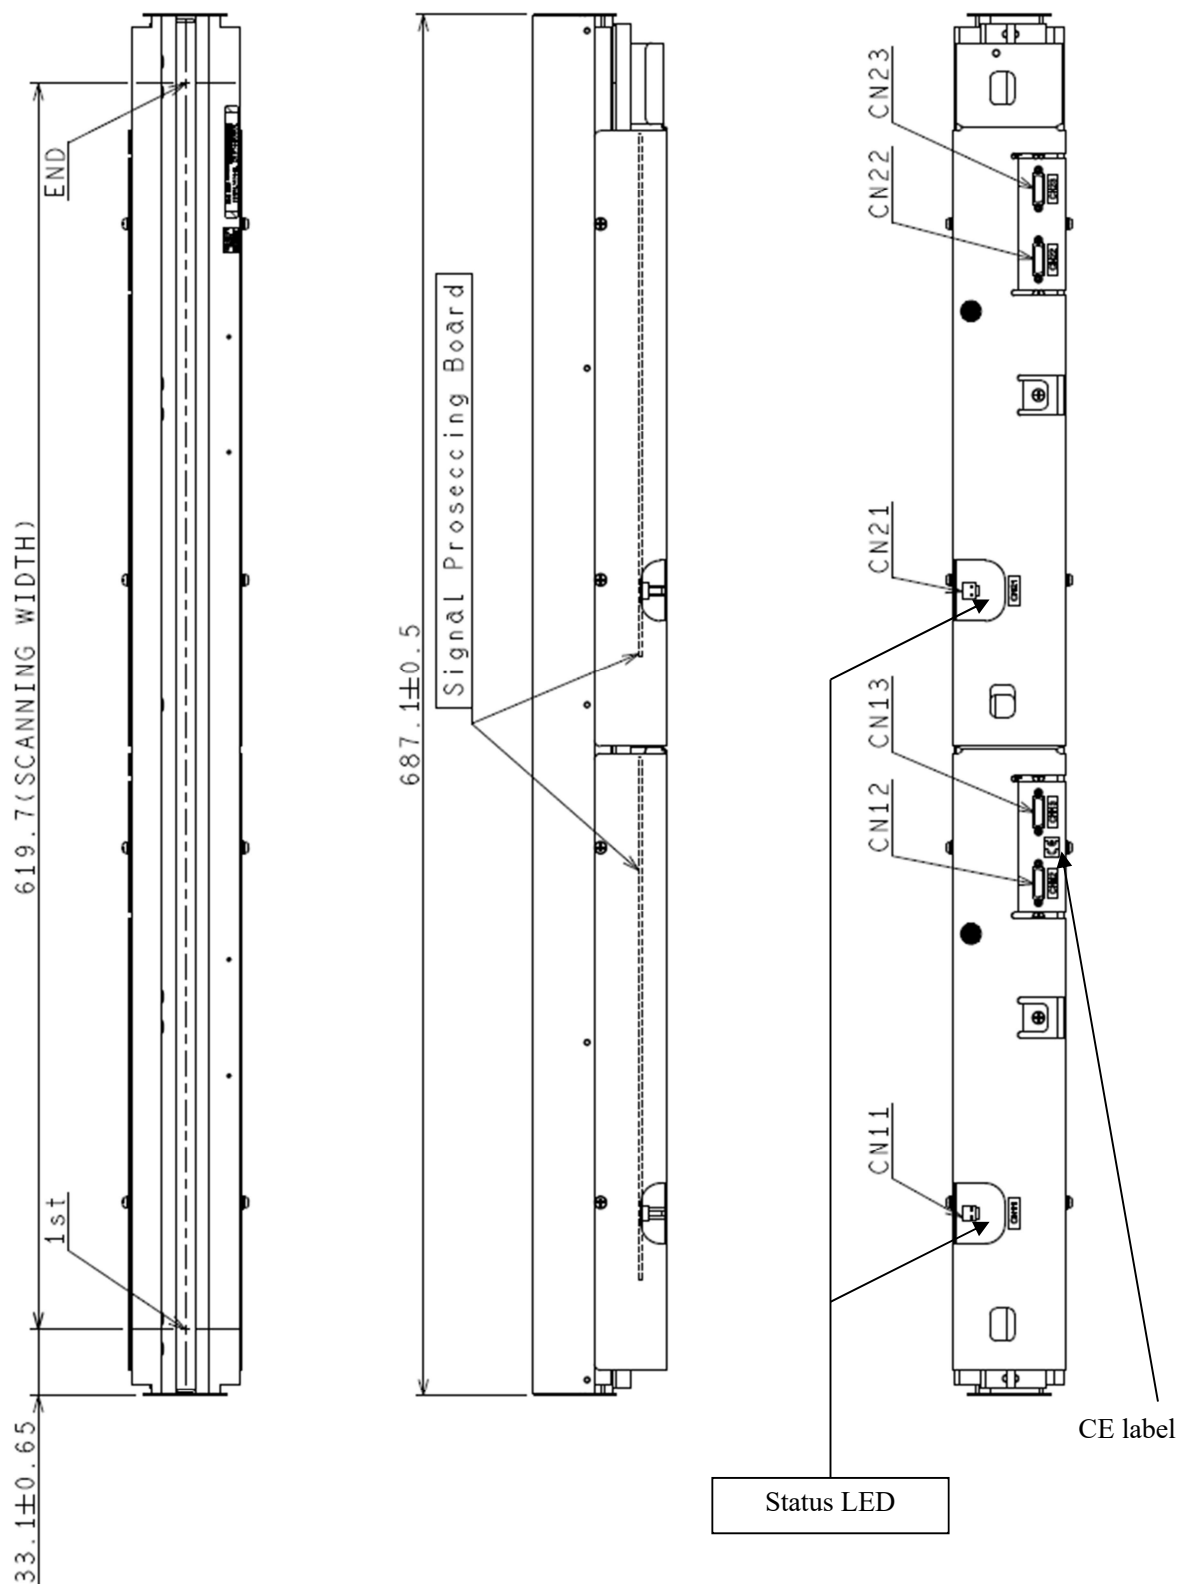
KD6R617AX4-NL Outline drawing (at 24°C)
